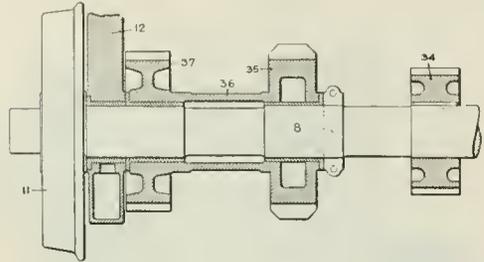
A Longitudinal Horizontal Section of an Axle Shaft
